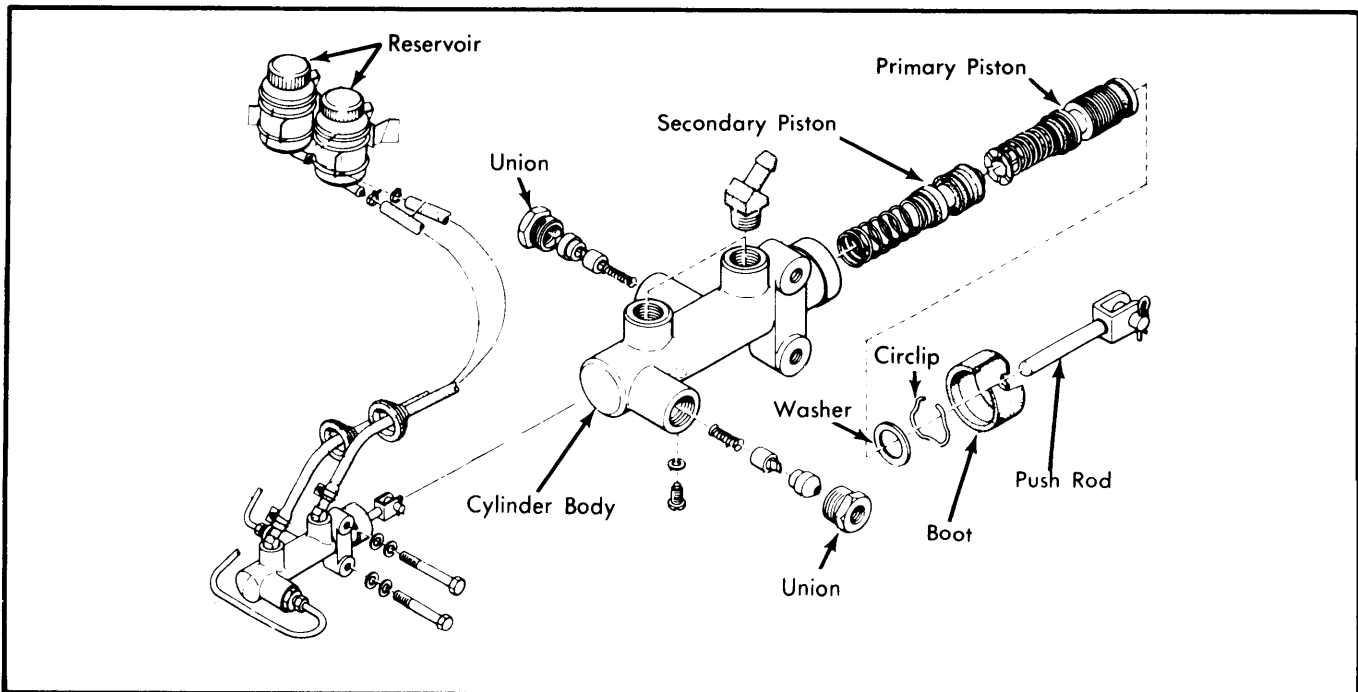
Exploded View of Components in Tandem Master Cylinder
